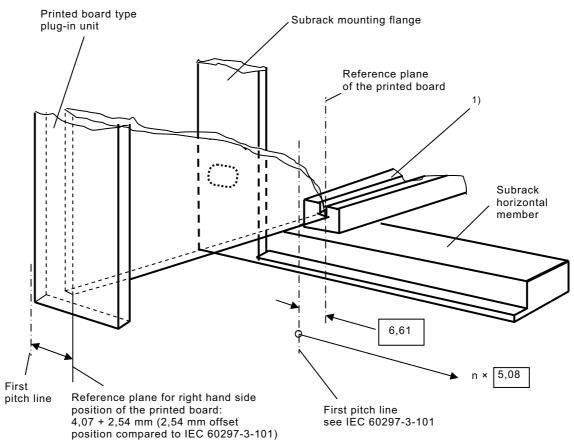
Alignment and/or electrical contact interface inspection dimensions
